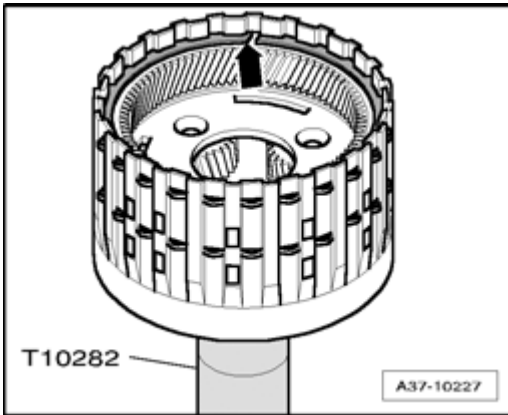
Identifying "I" + "II" Placed In Mounting Device T10282 And Circlip
